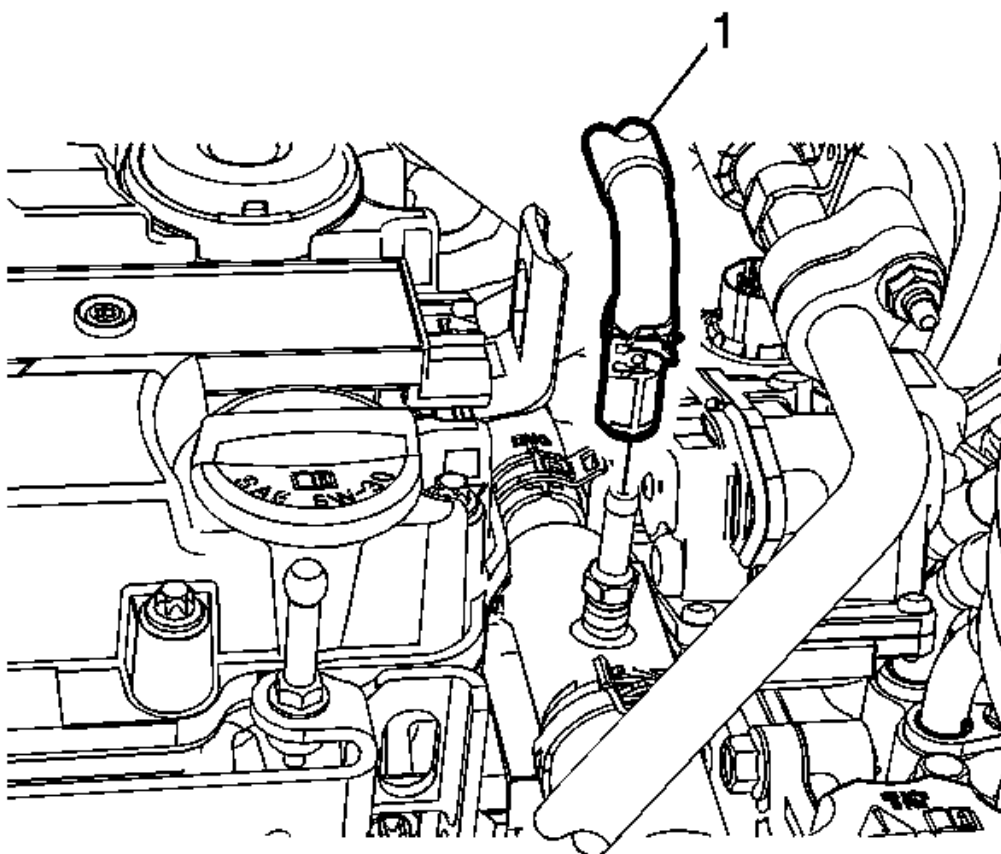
Heater Outlet Hose Vapor Vent Hose
